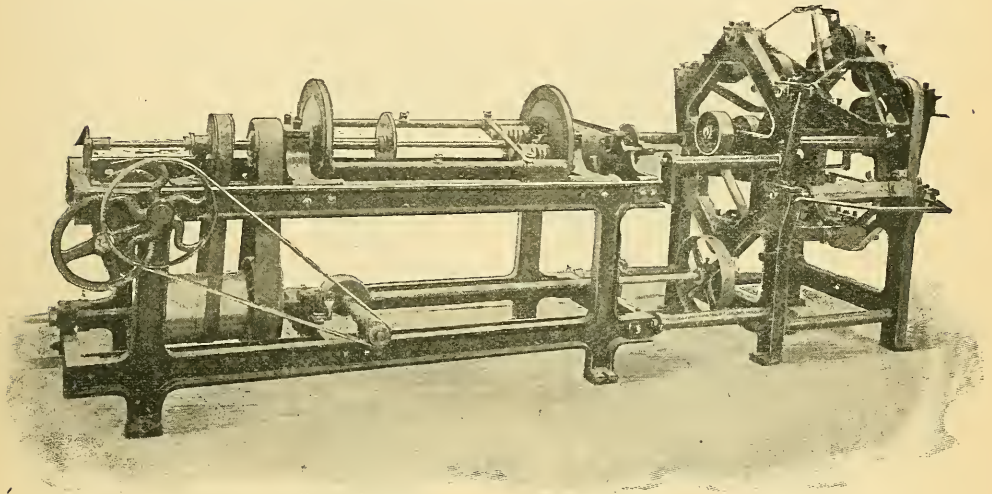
Horizontal laying machine for cords, etc. (5 to 8-fold).
